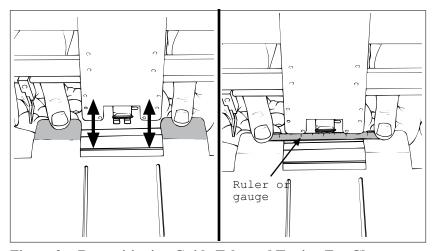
Respositioning Guide Tabs and Testing For Clearance
